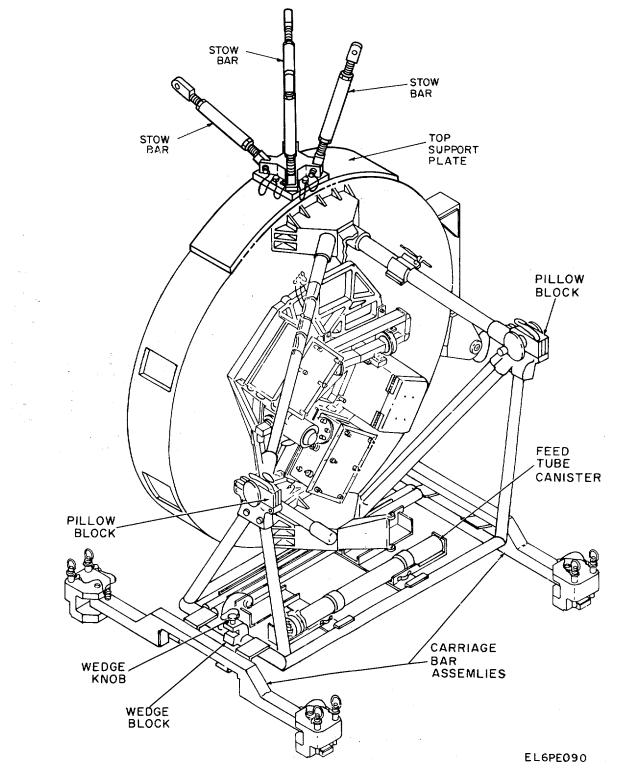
Antenna center Section and Carriage Assembly, Unstowing and Lifting Items (Sheet 1 of 2). 2-12
